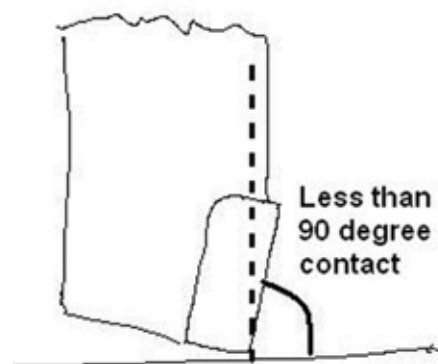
Negative Rake Angle of a tool contacting a workpiece
